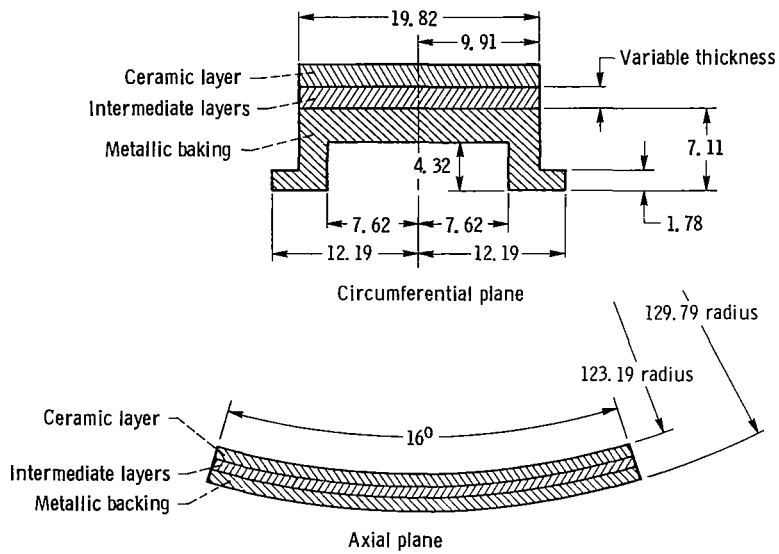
Outer gas-path seal configuration. All dimensions are millimeters unless otherwise noted.
